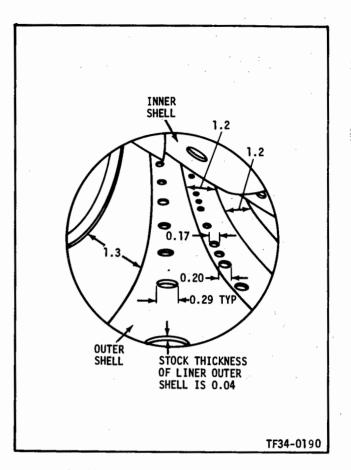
Typical View of Combustion Liner Outer Shell looking through Inspection Port at 10 O'clock Position
